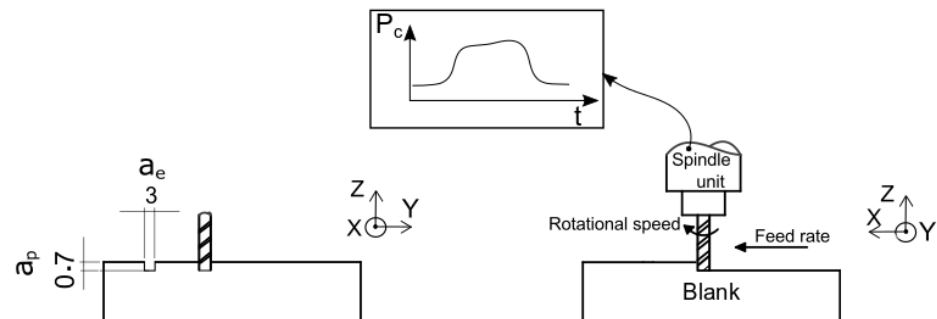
Schematic assembly of experimental setup (dimensions in mm).
